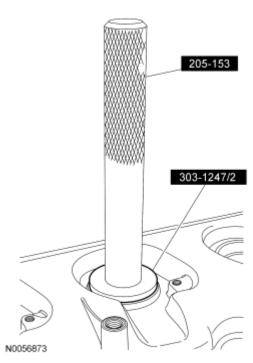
Installing VCT Solenoid And/Or Spark Plug Tube Seals Using Special Tools (205-153) & (303-1247/2)
